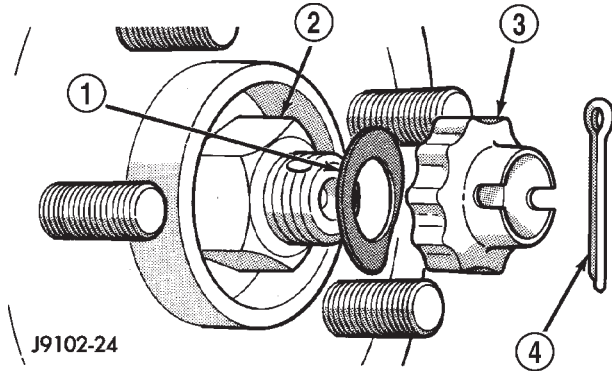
Cotter Pin, Nut Lock & Spring Washer Removal
